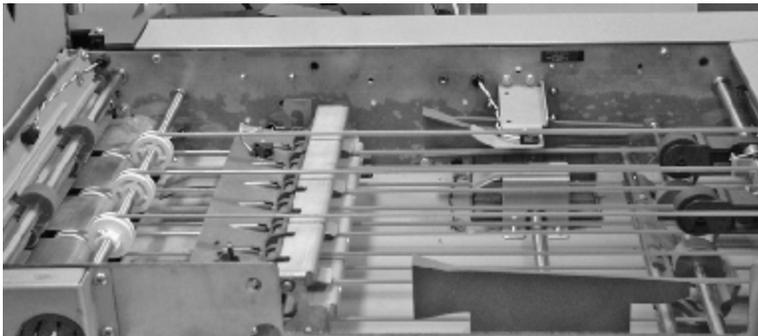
HCSF Cover Screws Shown with Top Cover Removed
